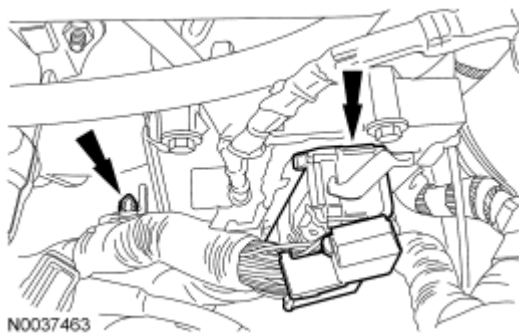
Locating Powertrain Control Module (PCM) Electrical Connector And Pin-Type Retainer
